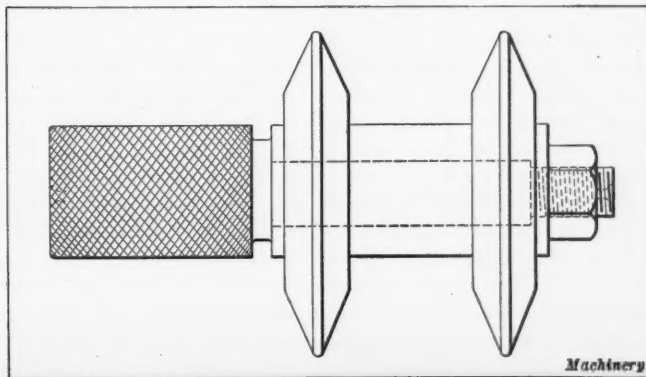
Simple Form of Gage used for testing Lead of Gage Thread
